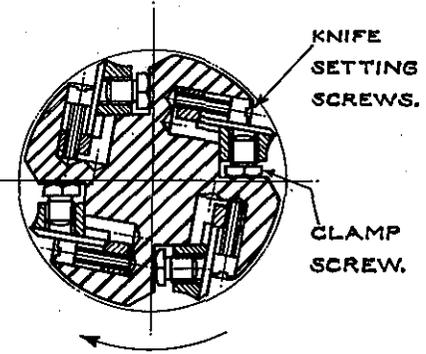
ARRANGEMENT OF CUTTERBLOCK SPINDLE.
